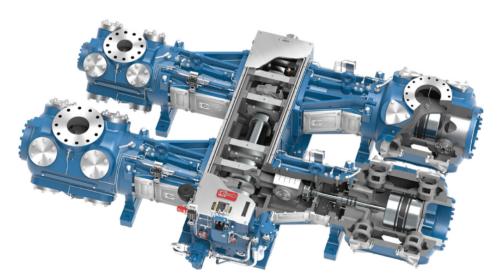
An example of a large size horizontal-type reciprocating compressor, courtesy of Arielcorp
